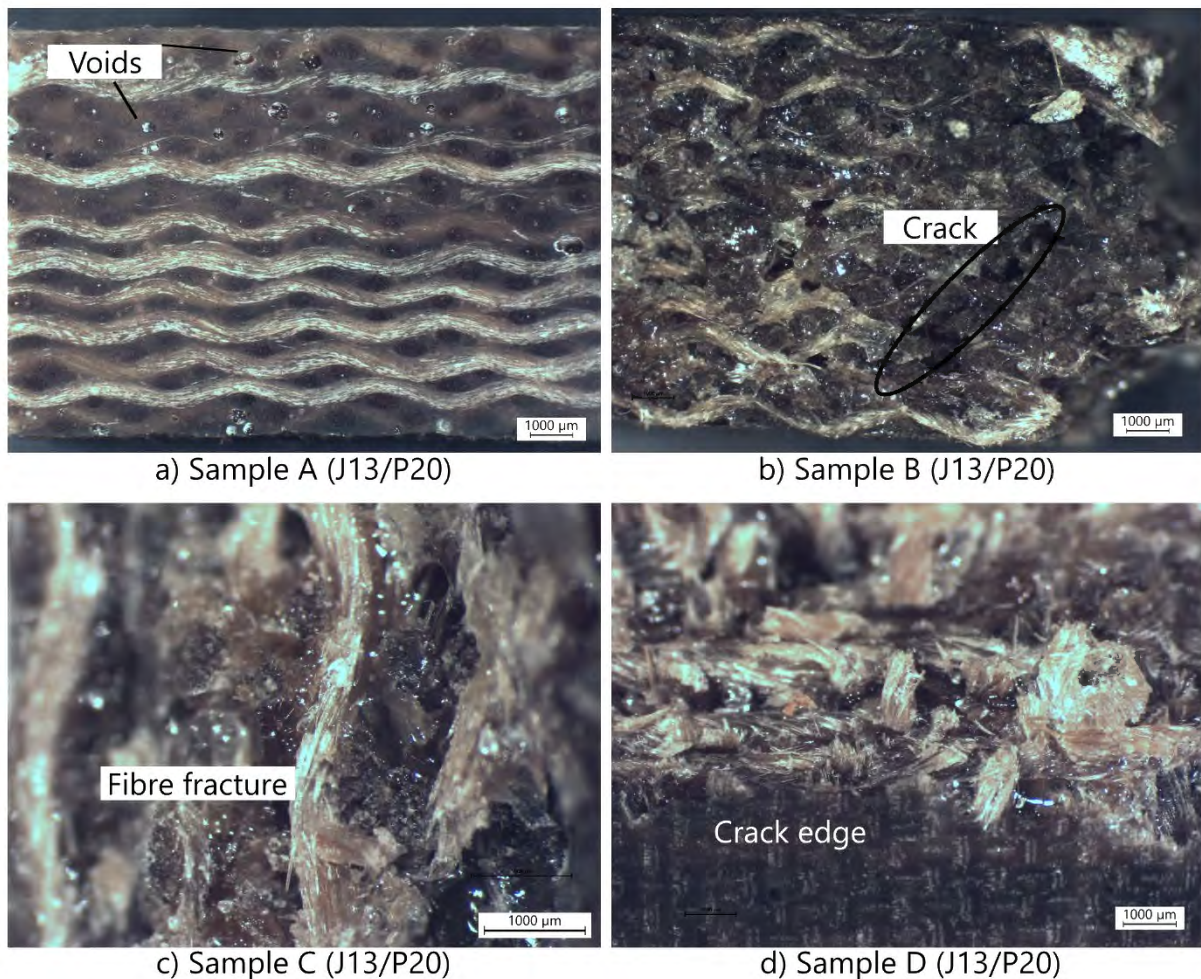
Stereomicroscope images of the fracture surfaces of a 13-layer jute fibre reinforced composite
